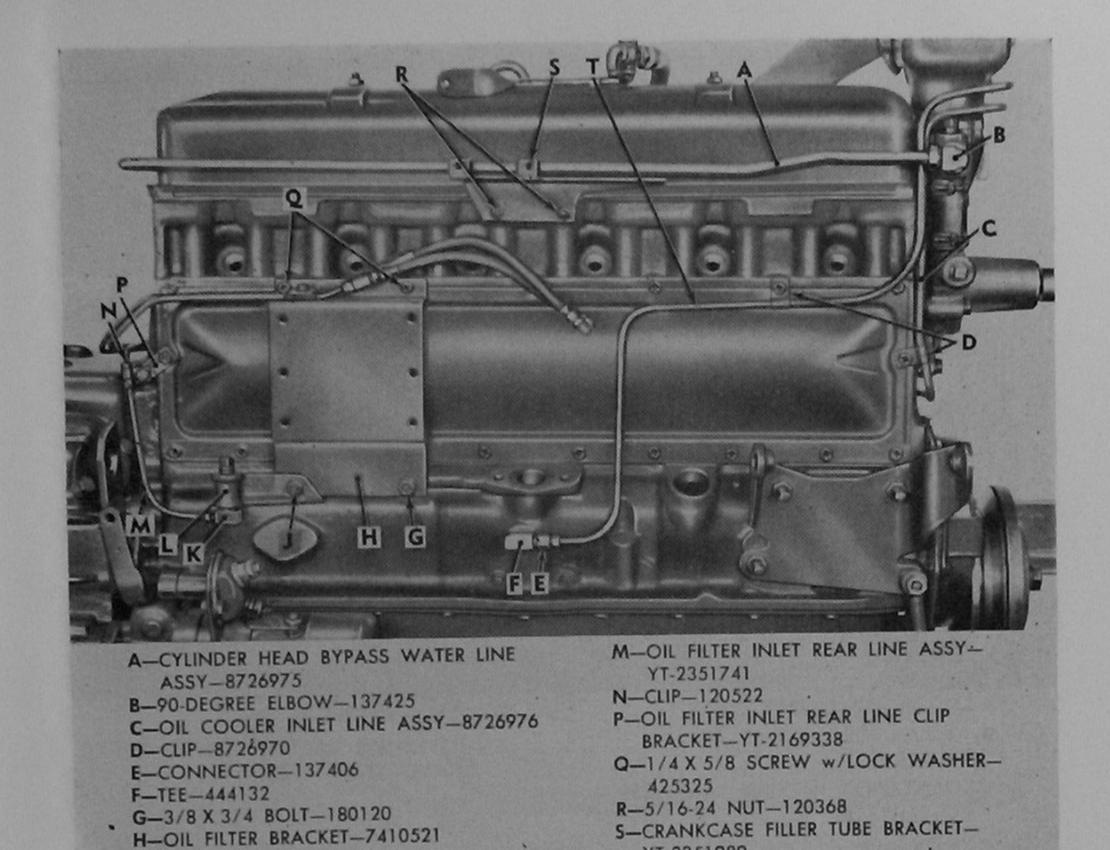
Right side of engine assembly 8726920 with oil filter, distributor, and generator removed.
